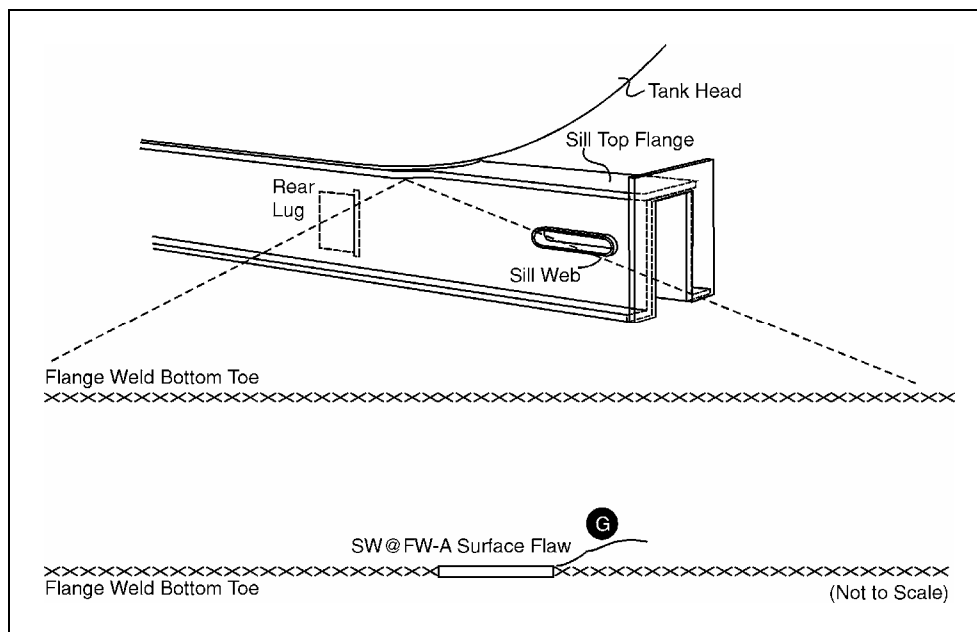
A-End Right Flange Weld Crack and Preflaw
